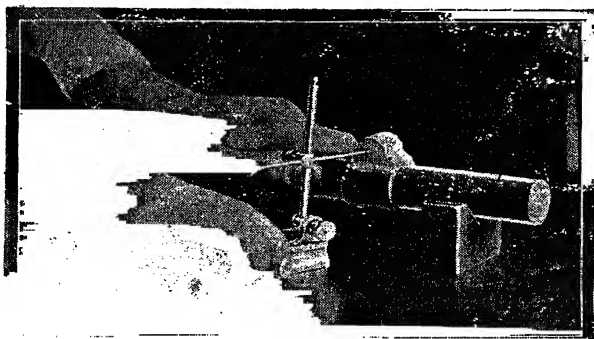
The casting being marked out above is to be drilled through the boss at a definite distance up from the centre hole.
